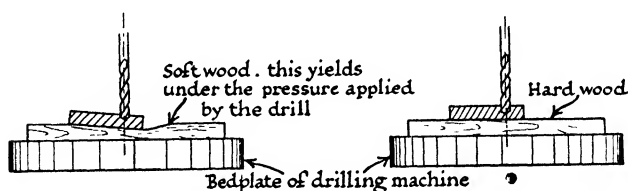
When drilling a strip of metal near one end, support it on a piece of hard wood
